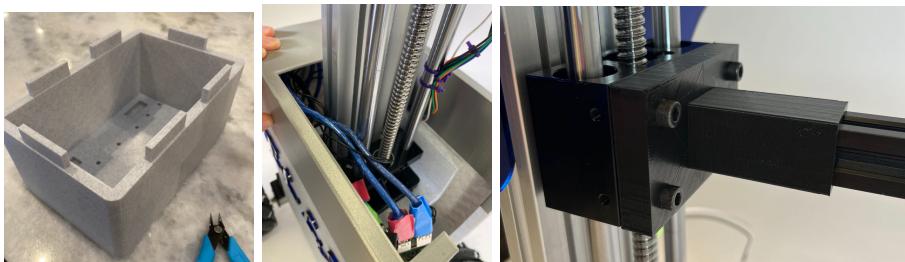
3D Printed Body Piece (1), Electronic Housing View (2), Arm Connector Piece (3)
